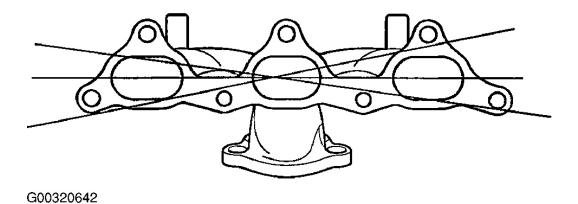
Measuring Exhaust Manifold Flatness Courtesy of KIA MOTORS AMERICA, INC.
